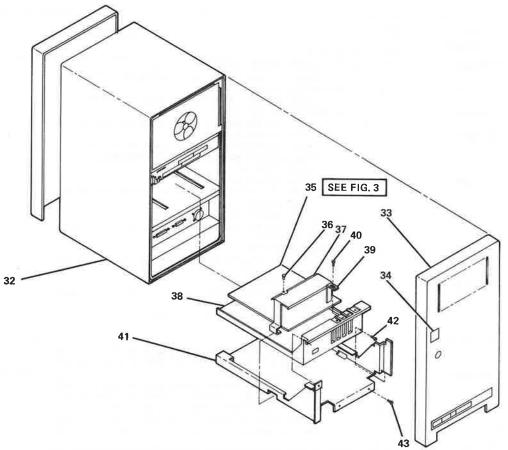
FINAL ASSEMBLY. SHEET 3 OF 3. INDEX NOS. 32-43. SEE LIST 1.
